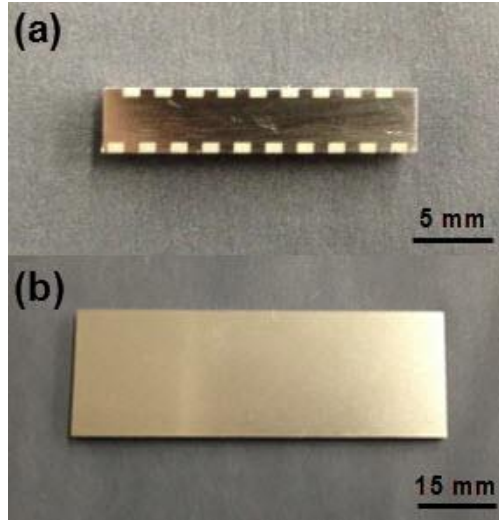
Test specimens: (a) upper specimen with pockets; (b) lower specimen of flat plate
